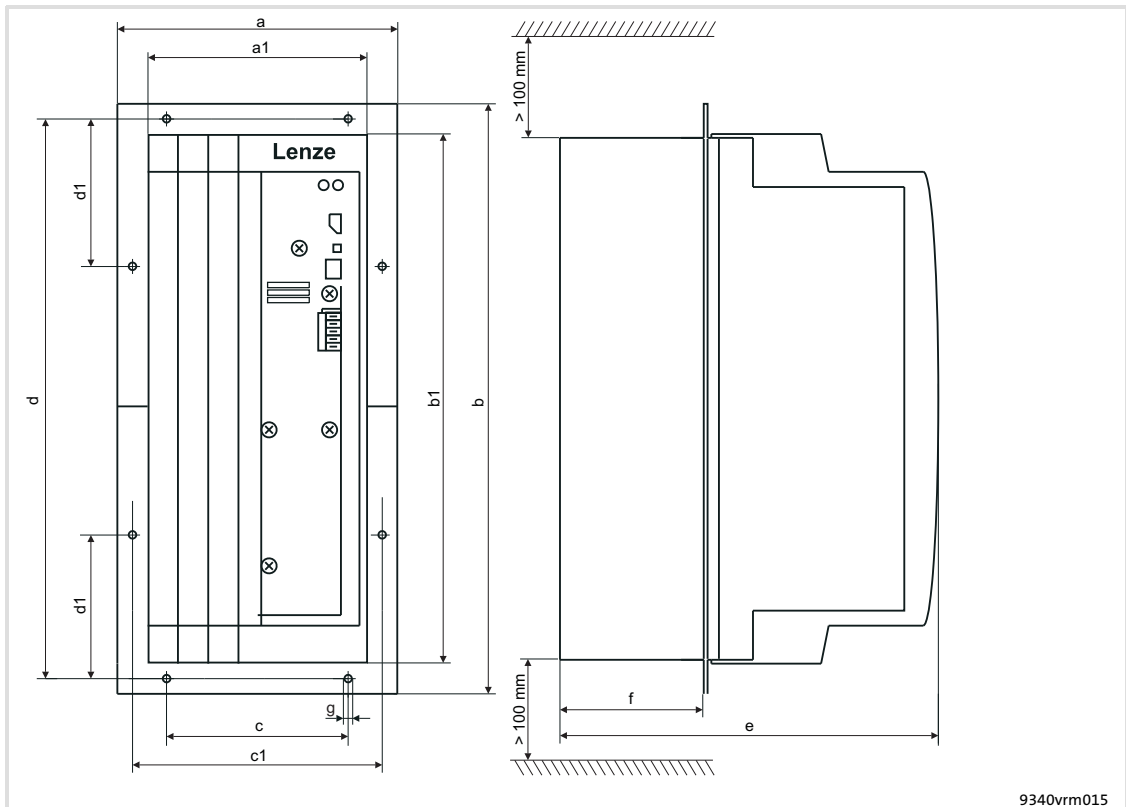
Dimensions of EMB9341-E and EMB9342-E for mounting in push-through technique
